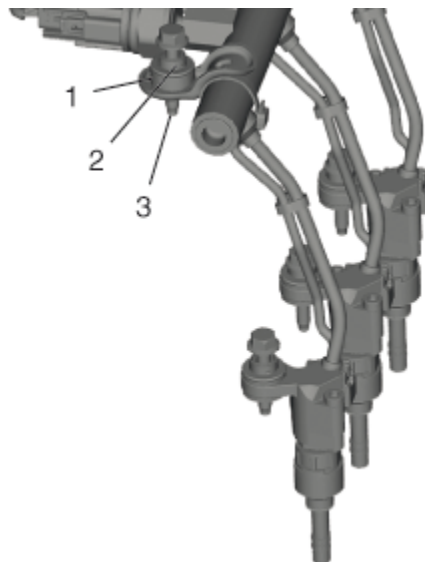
Fuel Injector Rail Assembly Bolts, Decoupling Elements And Retainer
